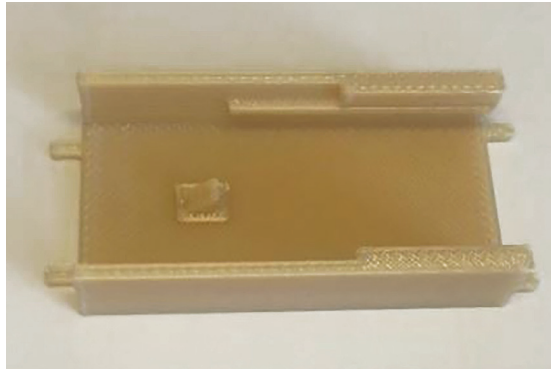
Custom ULTEM 9085 resin adapter. Receiver PCB was placed in here.
